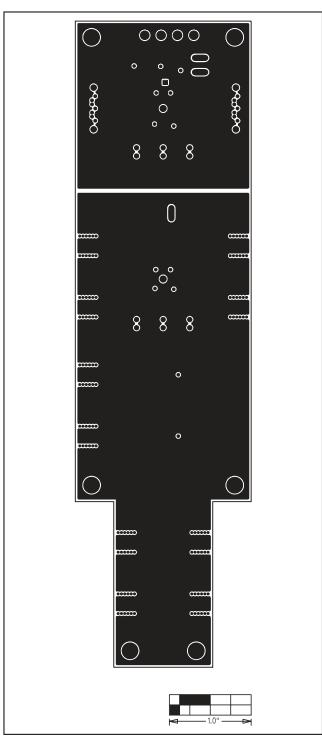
MAX4951 EV Kit PCB Layout—Inner Layer 3
